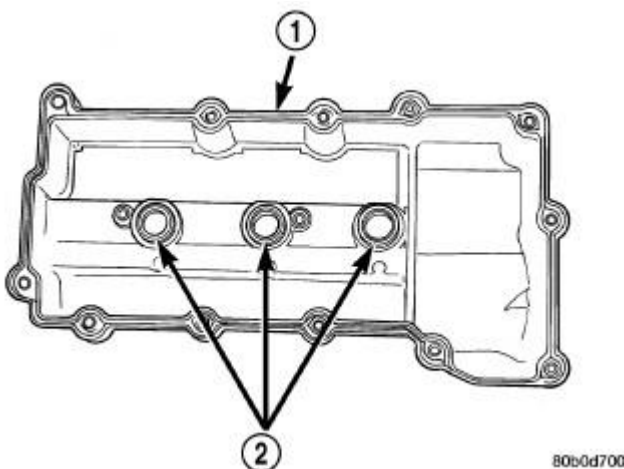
Cylinder Head Cover Gasket and Spark Plug Seals
